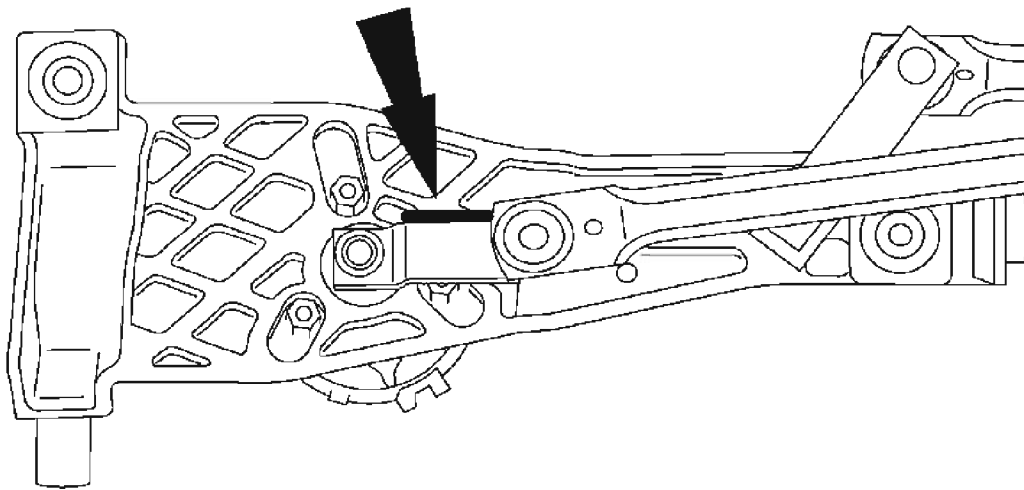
Removing Bolts And Windshield Wiper Motor And Linkage
